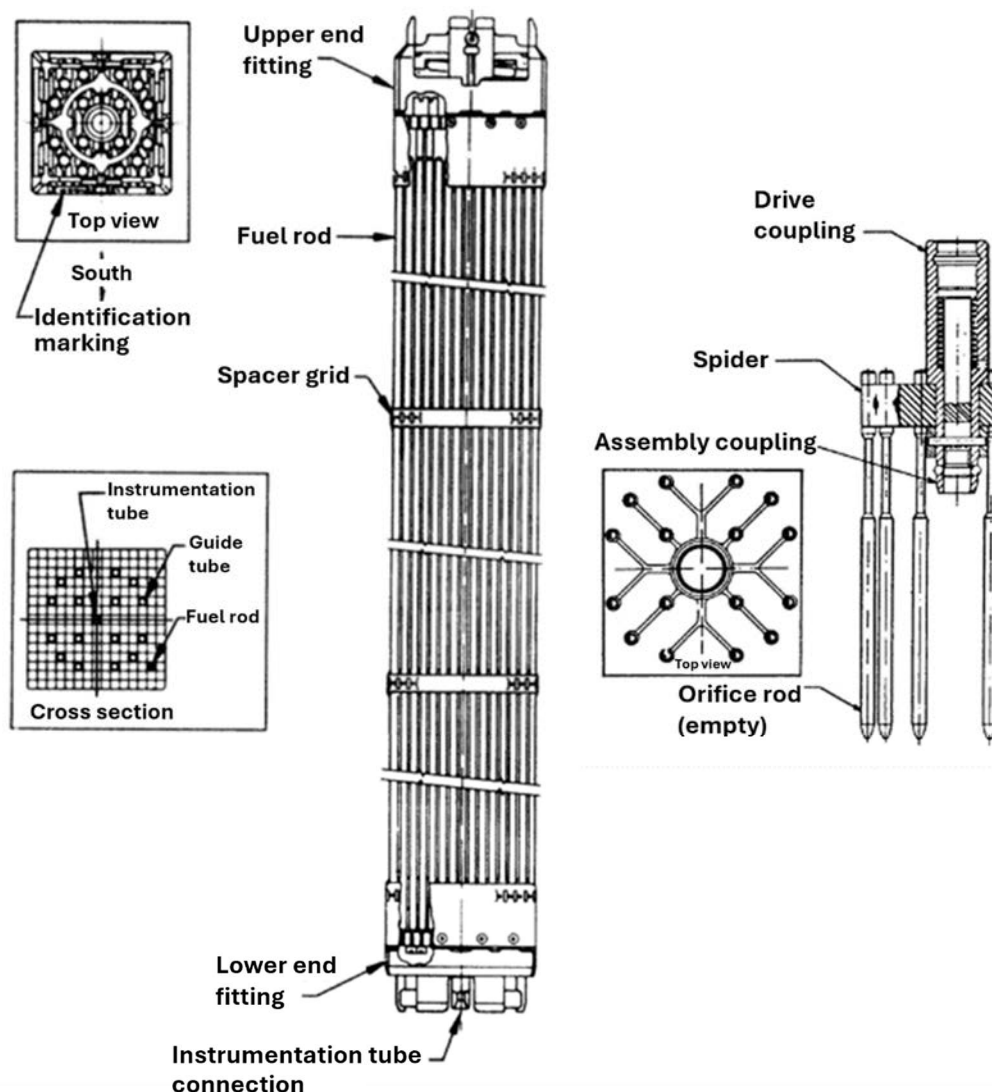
General configuration of 15×15 fuel assembly, left; control rod assembly right (reproduced from Ref [1] with permission courtesy of INL).
